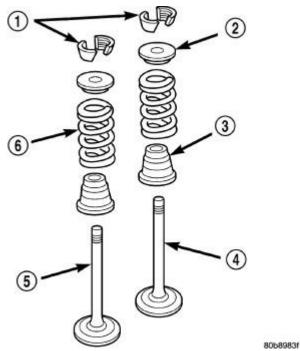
Valve Assembly Configuration Courtesy of CHRYSLER LLC
